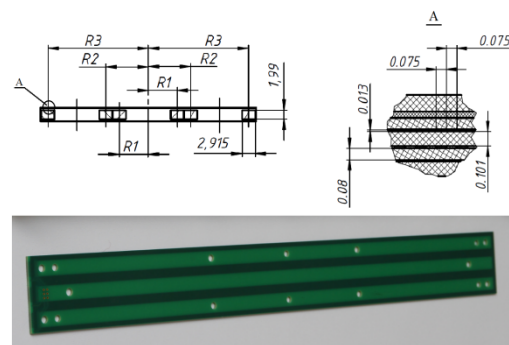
Cross-section view of the PCB with harmonic coils and photo of PCB.
